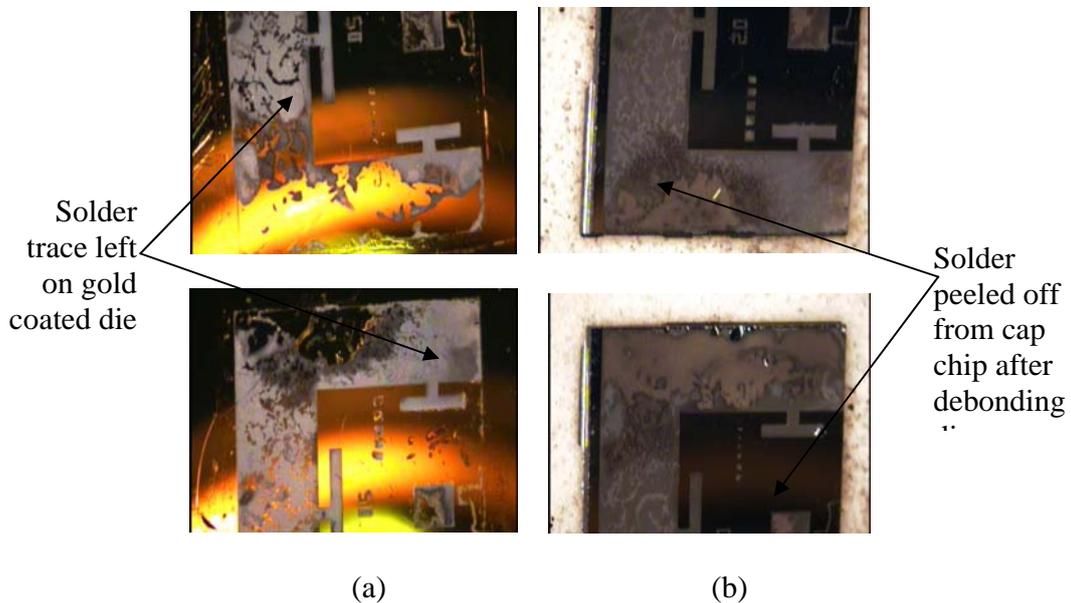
(a) Solder left on substrate die and (b) Solder coated die after de-bonding
